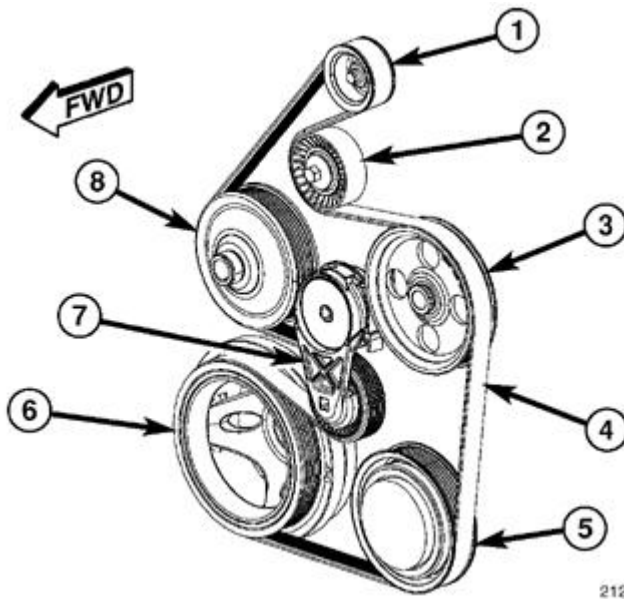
Identifying Accessory Drive Belt Routing - 5.7L
